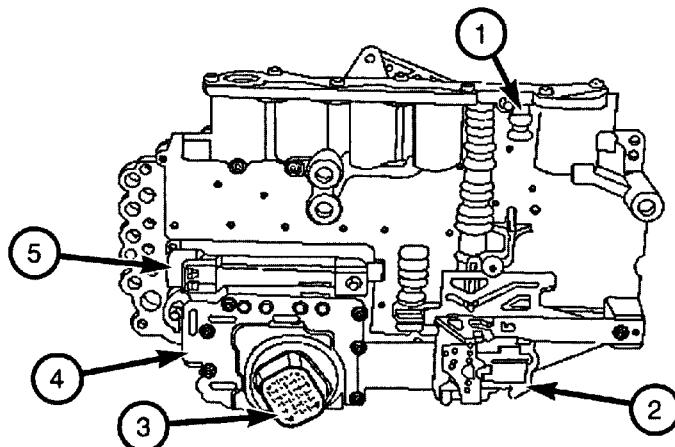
RFE Series Solenoid/Pressure Switch Assembly
